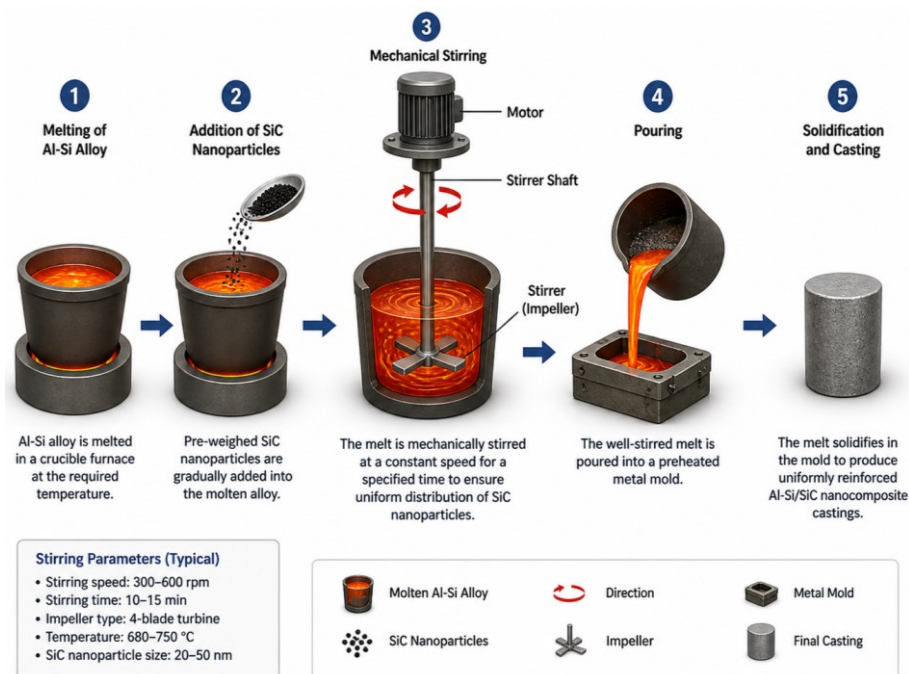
Schematic explanation of the mechanical stirring casting technique used to prepare the samples in this work
